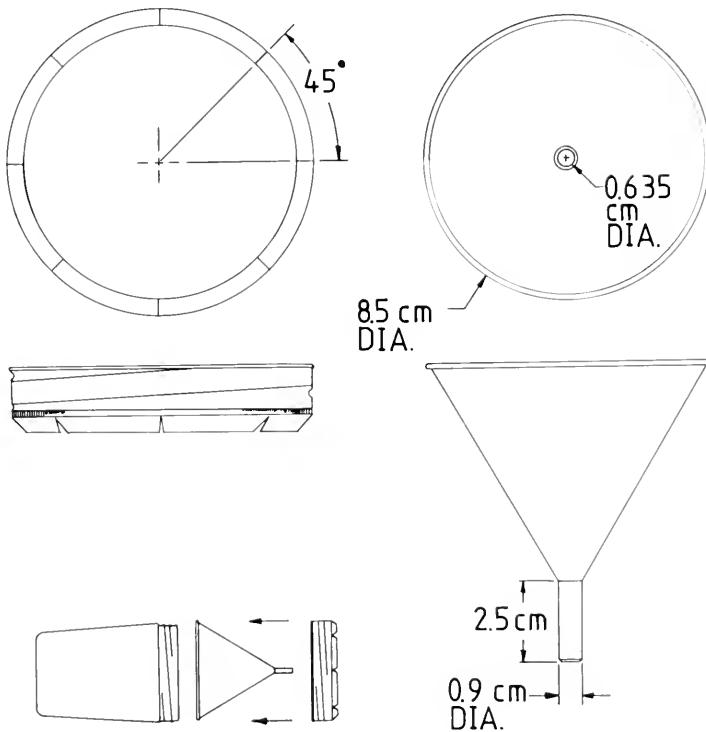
Components and assembly of collecting apparatus: modified Ball® jar band, modified funnel, and assembly.
